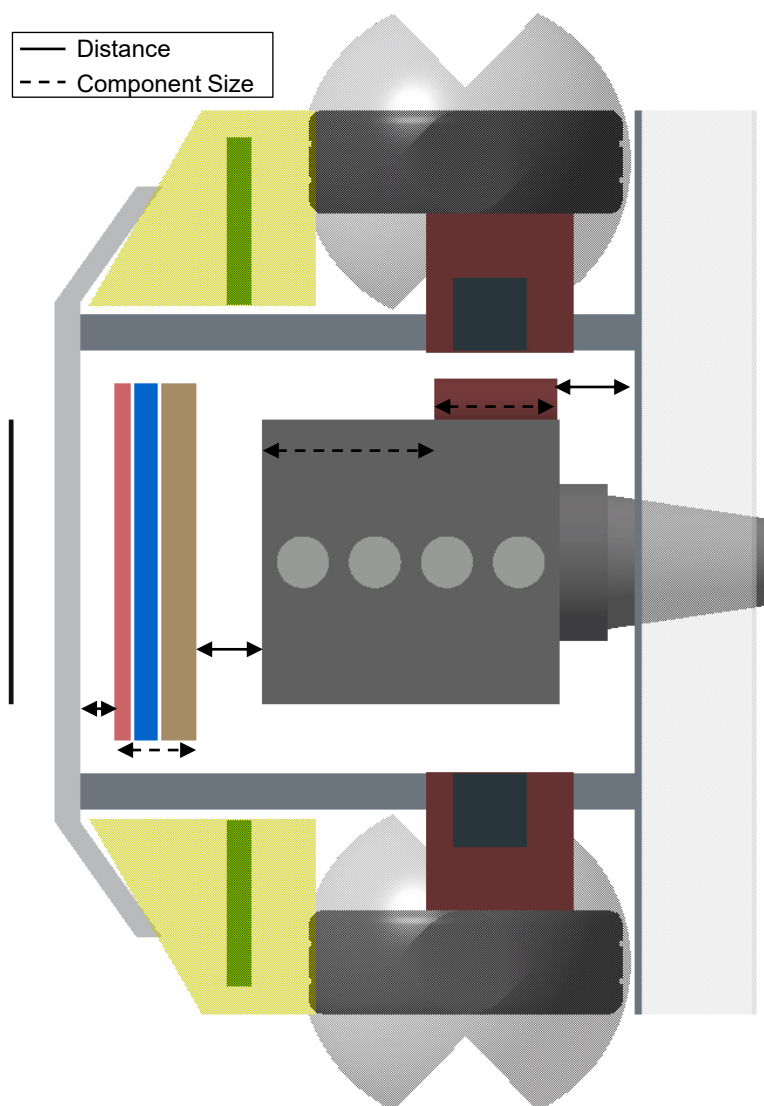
Dimensional chain over the cooling system, engine, and exhaust system in the x-direction
